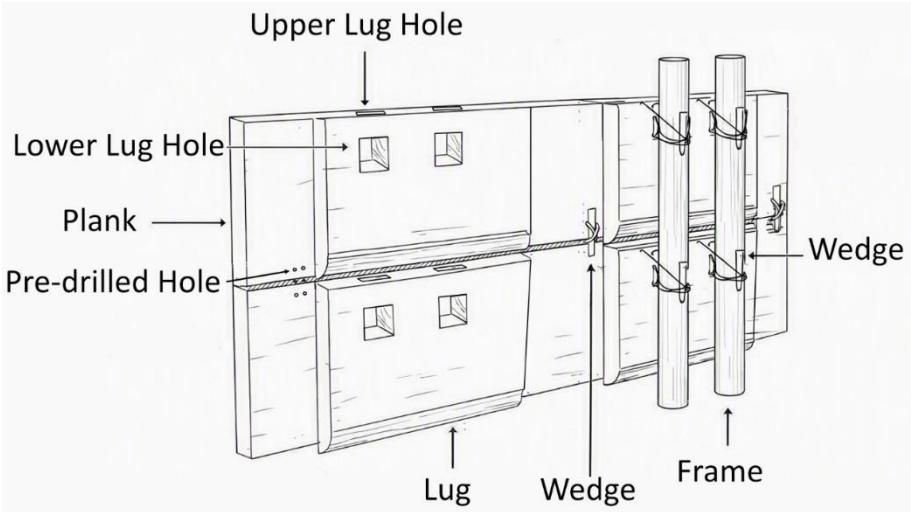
A reconstructed 3D model of the plank-fastening method found on a timber of the KT boat.
